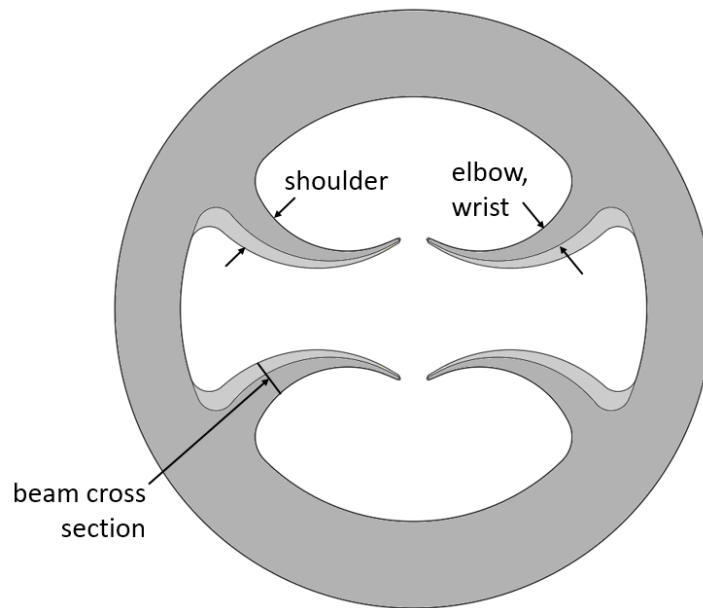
Difference in flexure geometry between shoulder and elbow or wrist. The shoulder flexure has a larger beam cross section (beam height) for greater stiffness, but the surfaces that the contactors ride on are the same for all flexures.
